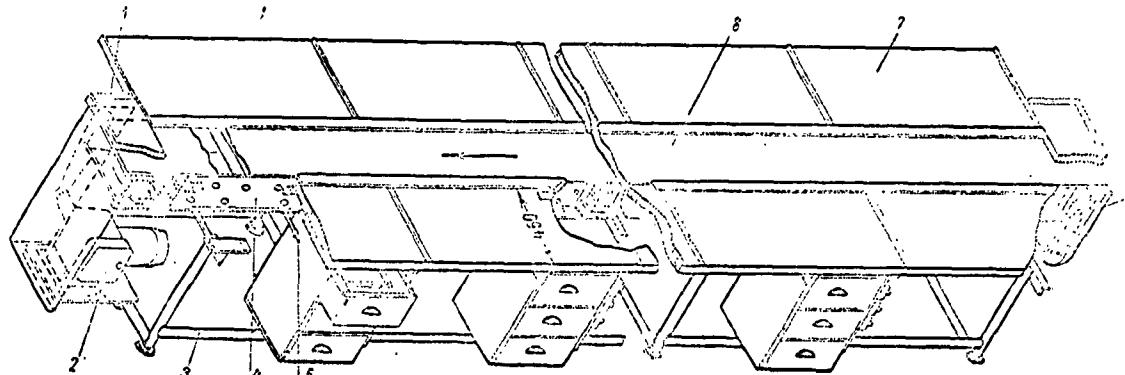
Layout of belt conveyor with arrangement of workplaces along its length. 1) Driving section; 2) reduction gear with electric motor; 3) frame of base; 4) operating section; 5) air pipe; 6) tightening sec-
